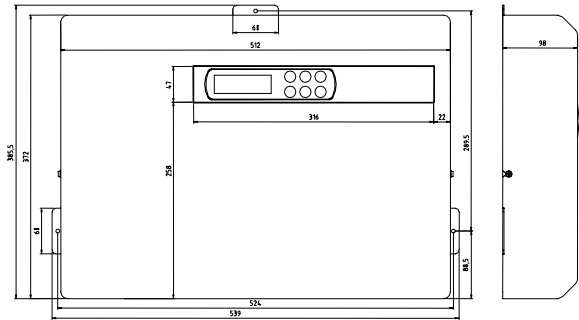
Dimensions of heat pump controller WPM 2004 R
